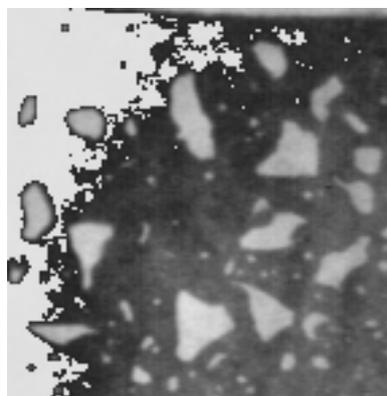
X-ray image showing solder voids. Void enclosures in the solder layer are visible as bright spots[64].
